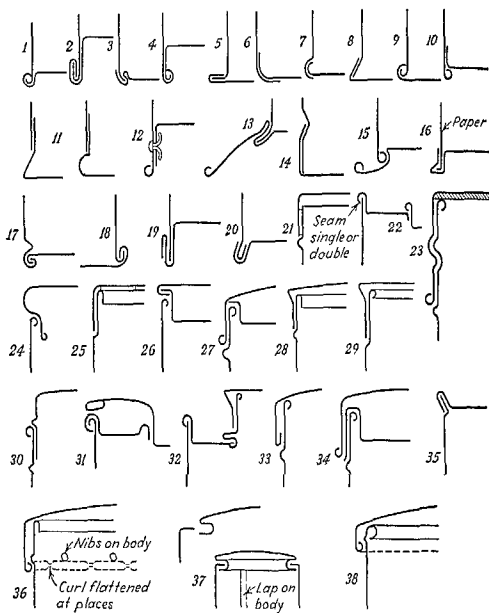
Attachment of tops and bottoms to sheet-metal container. (Mills.¹²)
